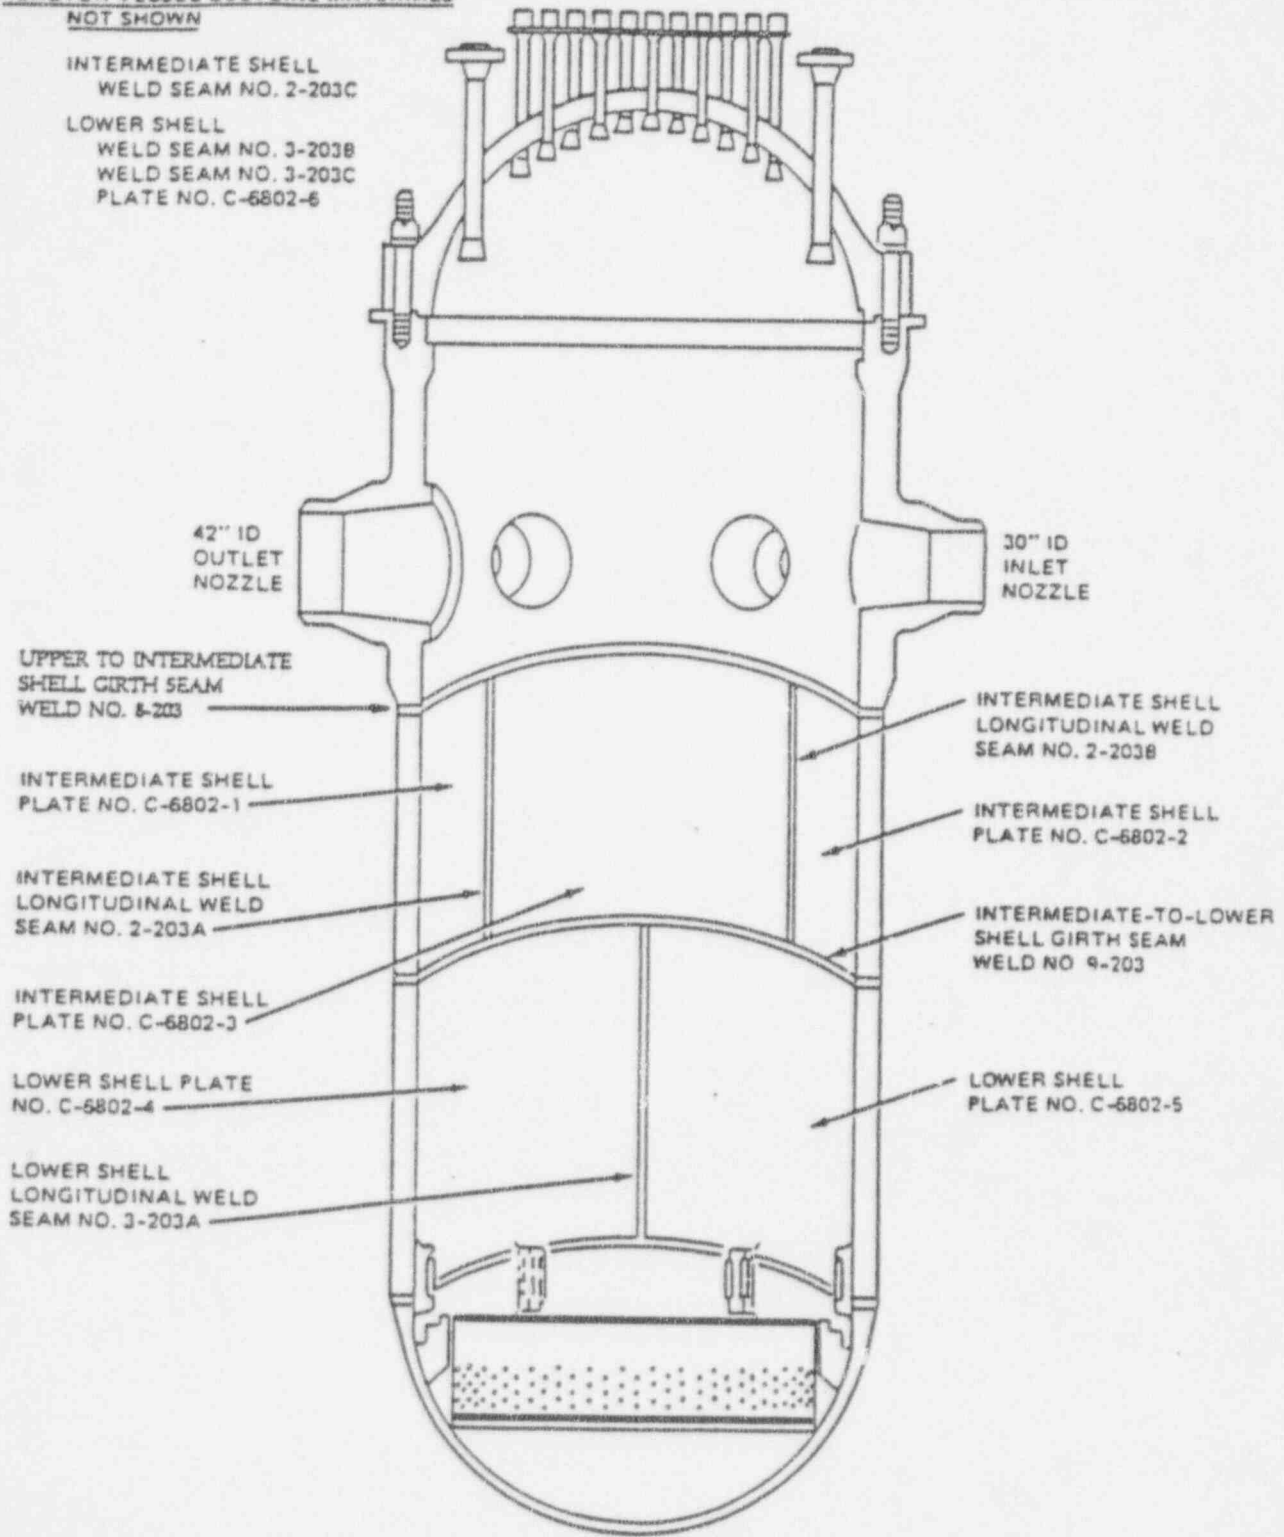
SONGS, Unit 3: Location and Identification of Beltline Plates and Welds.
